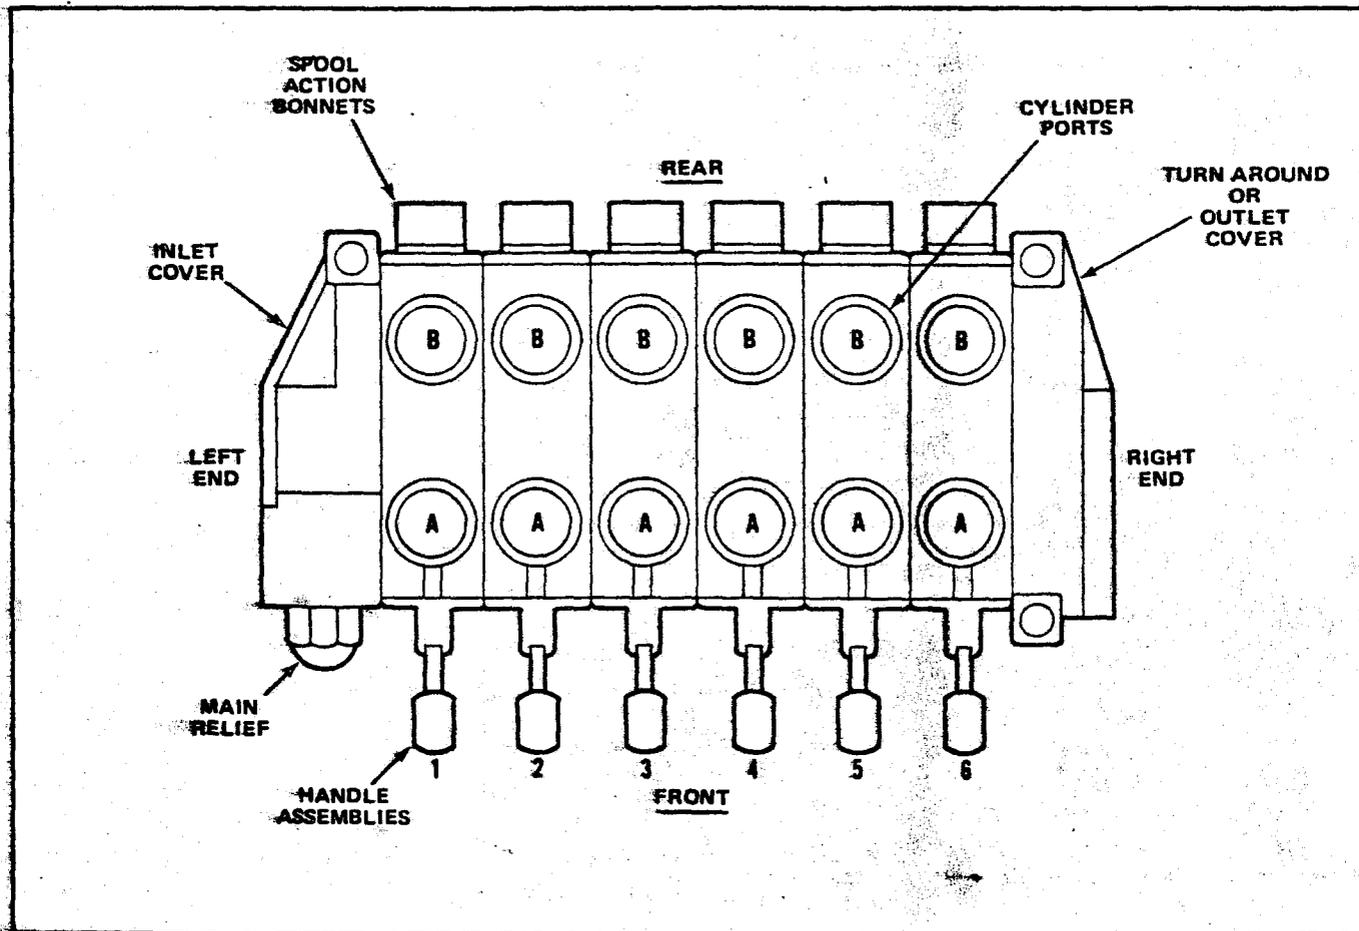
Schematic-View of Typical Model CP Control Valve Assembly.
